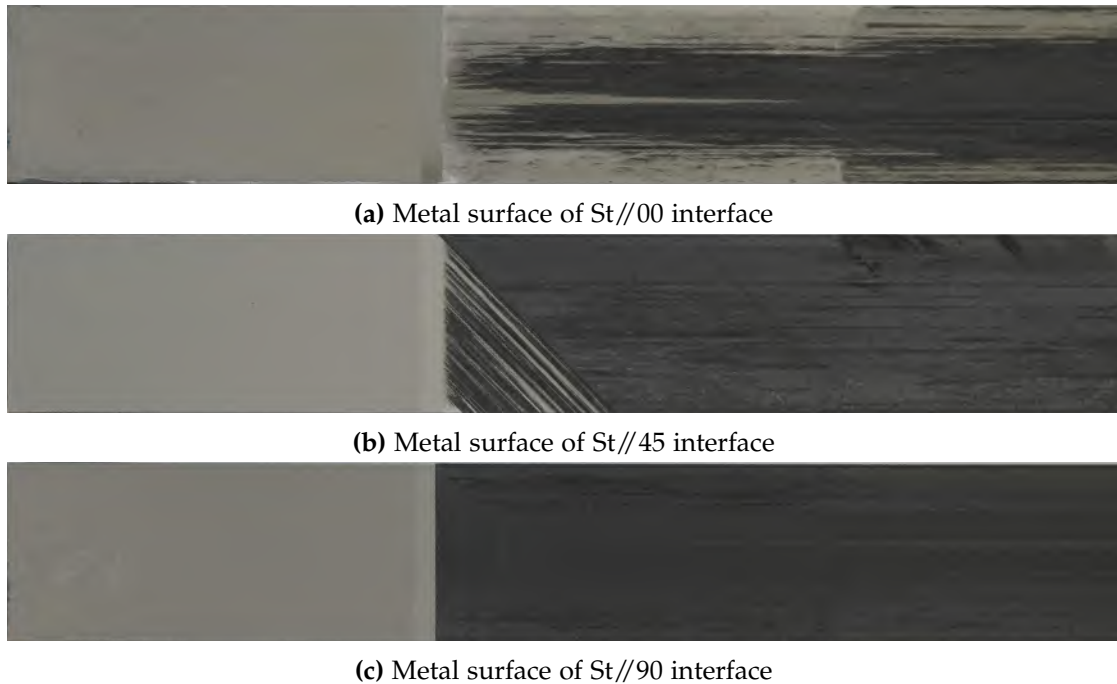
Fracture surfaces of hybrid DCB specimens
